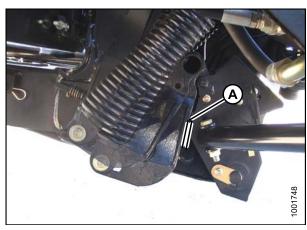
A - 0.12 in. (2–3 mm) clearance
